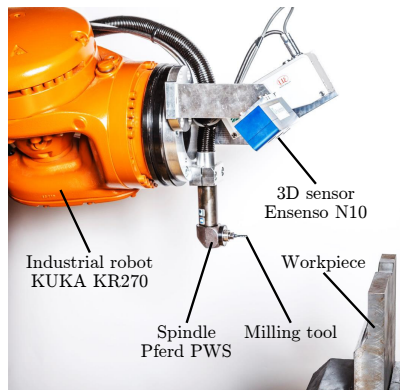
Experimental setup with deburring tool and 3D sensor.
